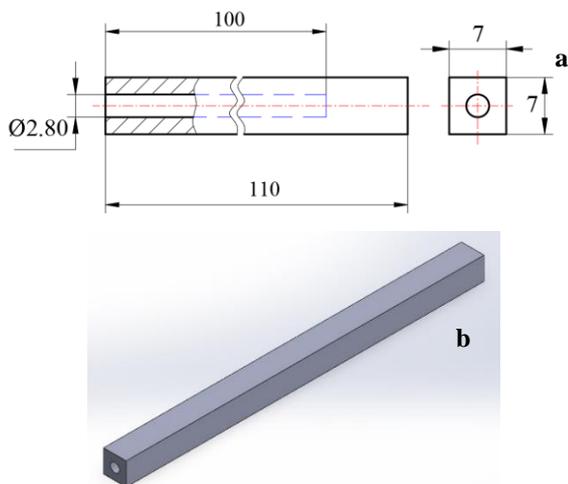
Thermal conductivity measurement samples a) Technical drawing (mm) b) Solid model
